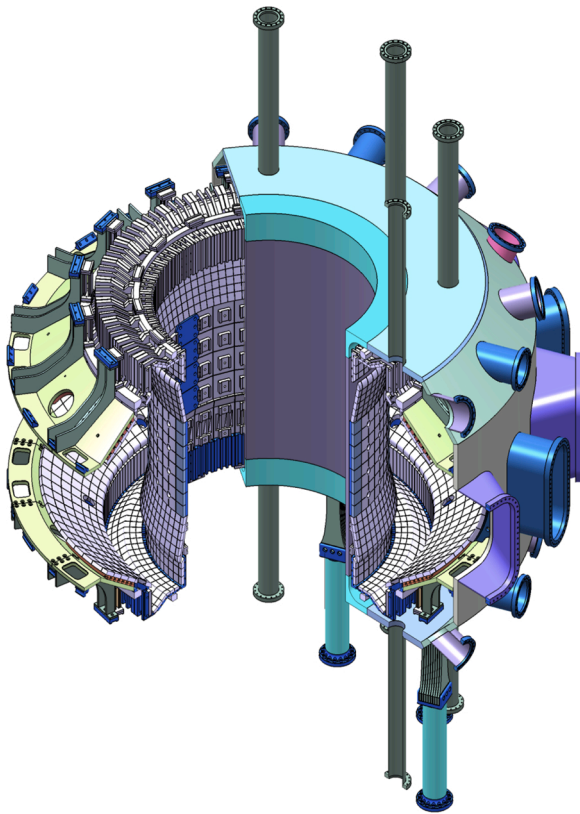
Cut through the COMPASS-U vacuum vessel, the passive stabilizing plates and the PFCs.
